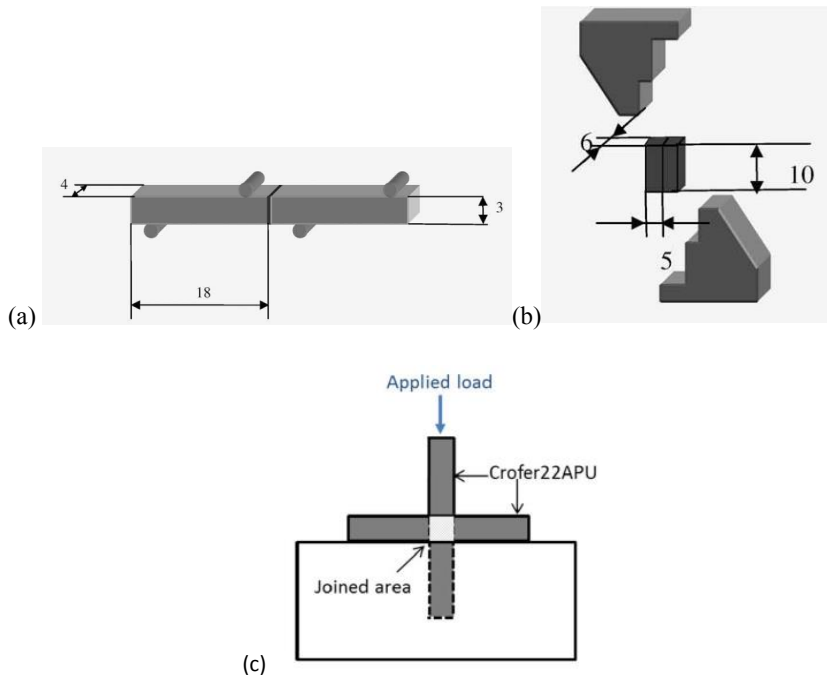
Shear testing methods (dimension mm): (a) asymmetrical four-point bending test; (b) single-lap test in compression (SL)(c) cross-bonded test (ISO13124 standard) [122, 123].
